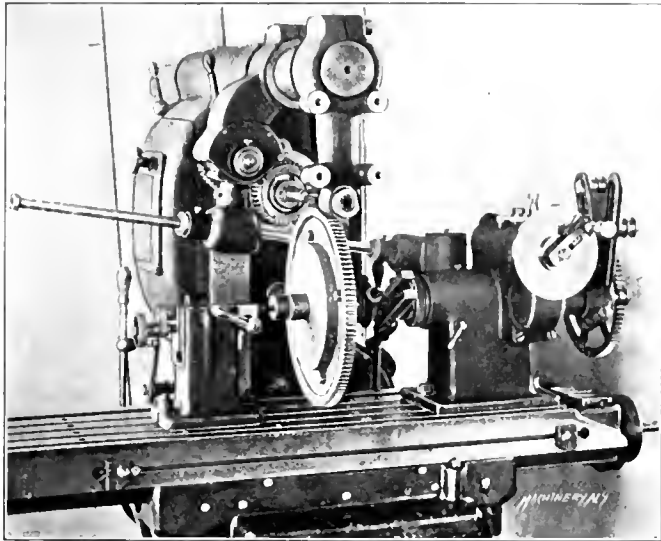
Hobbing Attachment for the LeBlond Milling Machine Cutting a Large Worm-wheel.
